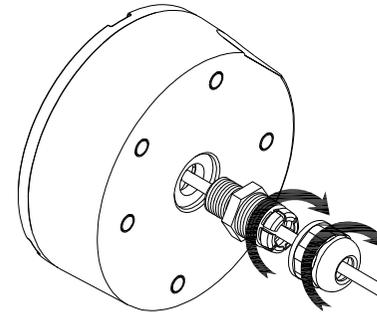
BOTTOM CONDUIT INSTALLATION
